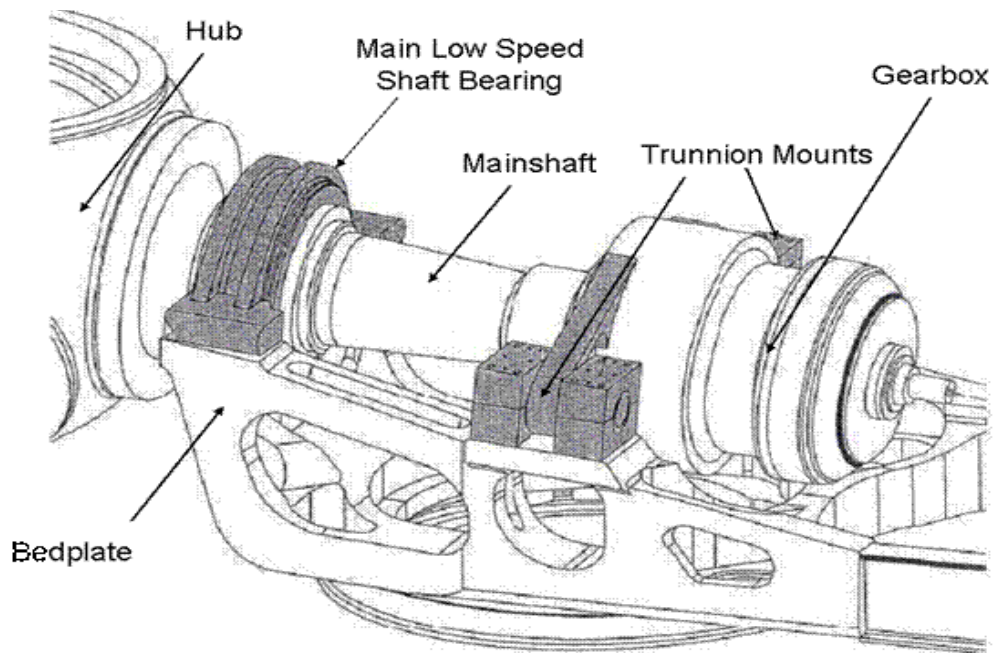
Traditional Three Point Slow Speed Axle and Gearbox Mounting [6]
